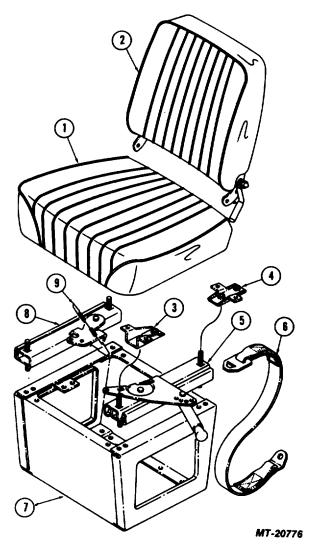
Individual Drivers Seat - Custom Trim Exploded View
